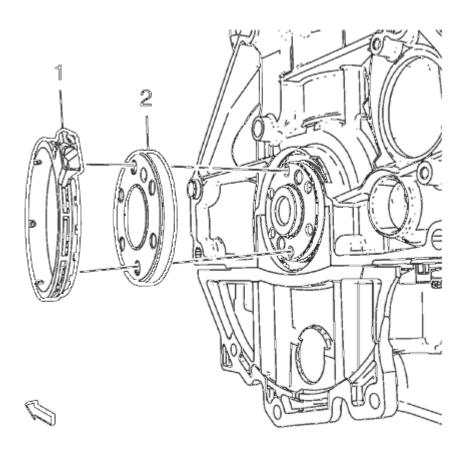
View of Actuator Courtesy of GENERAL MOTORS COMPANY
